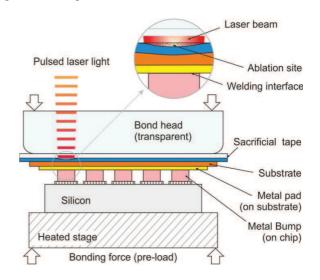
Laser-ultrasonic micro-welding process as applied to flip chip assembly.
